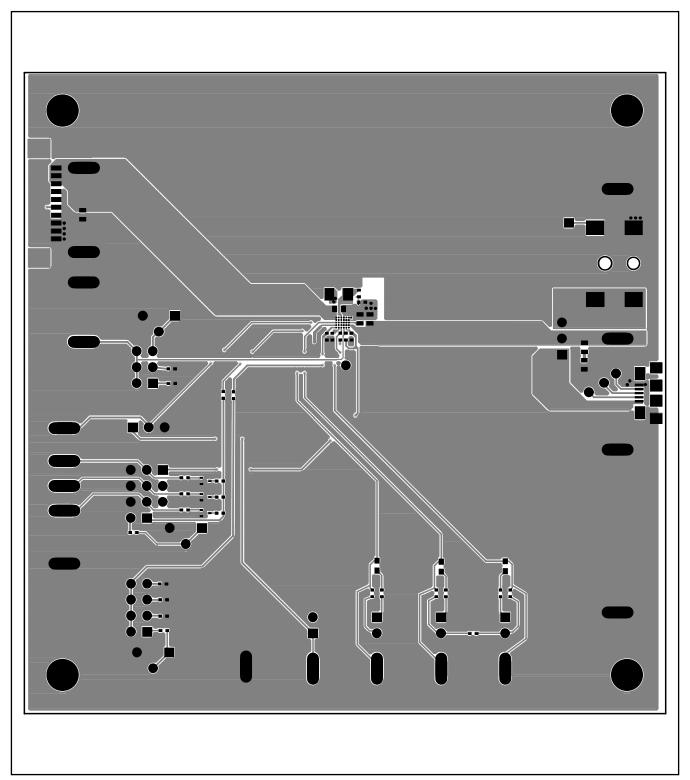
MAX8900A EV Kit PCB Layout—Top Layer
